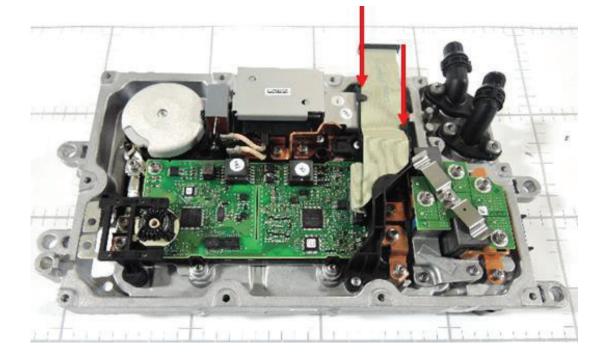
Audi DC/DC Converter: Ribbon Cable and Trough Installed Top, Board to Board Ribbon Cable Center and Wire Trough Bottom
